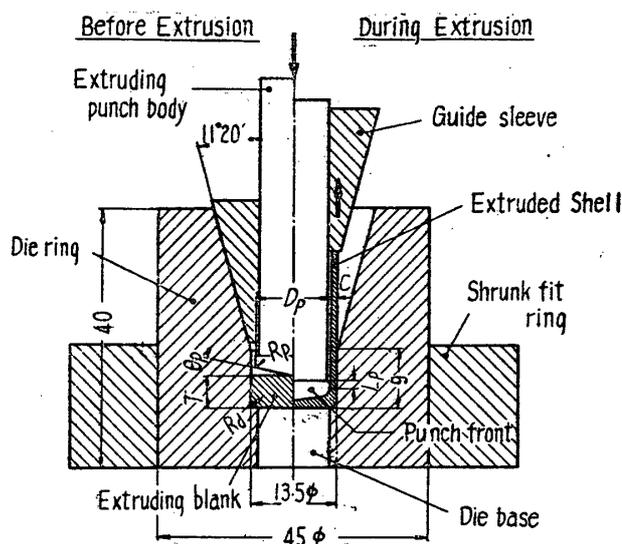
Tool Assembly Used for Extruding Test with Die Cavity of Diameter 13.5 mm.
